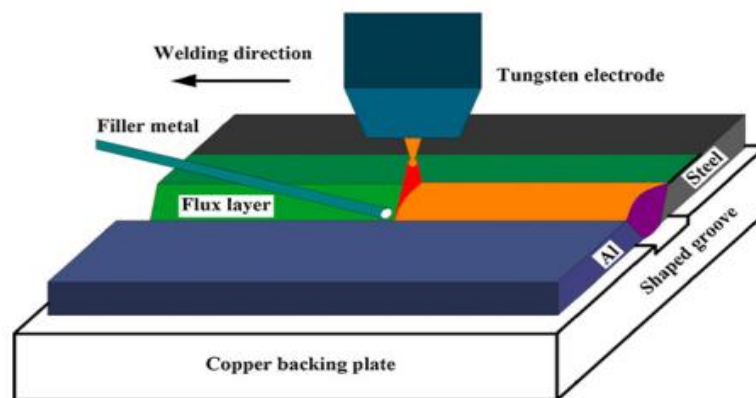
Schematic of aluminium–steel butt TIG welding
